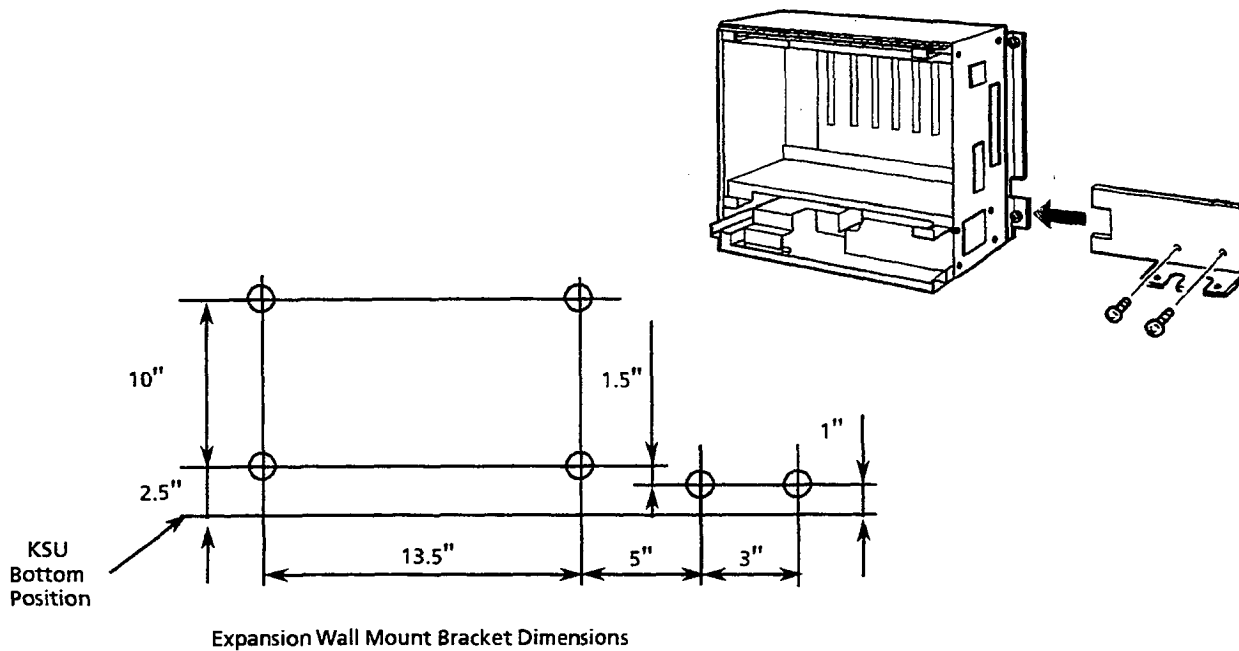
Attaching the Wall Mount Bracket of the Level II Expansion KSU to the Wall
